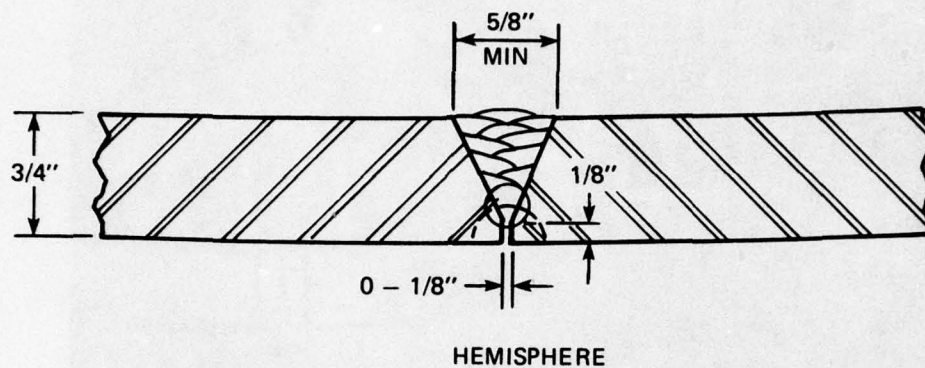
Welding Fitup for Inner Layers of Heads and Cans
